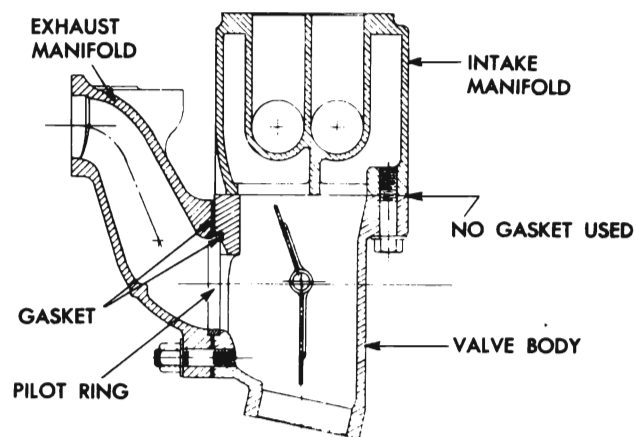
Sectional View of Joints Between Valve Body and Manifolds
